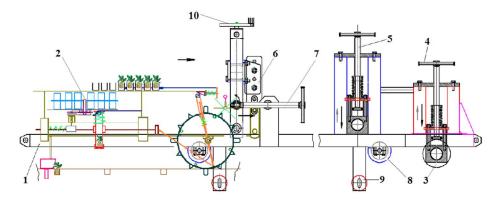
The trolley stand with the automatic transplanter 1 –carriage frame; 2 –transplanter; 3 – roller ; 4 – roller mechanism; 5 – wheel loading mechanism; 6 – mounting bracket of the machine; 7 – adjusting device for the extent of tilt; 8 – upper reel; 9 – lower reel; 10 – tool for adjusting the vertical mounting of the machine.
